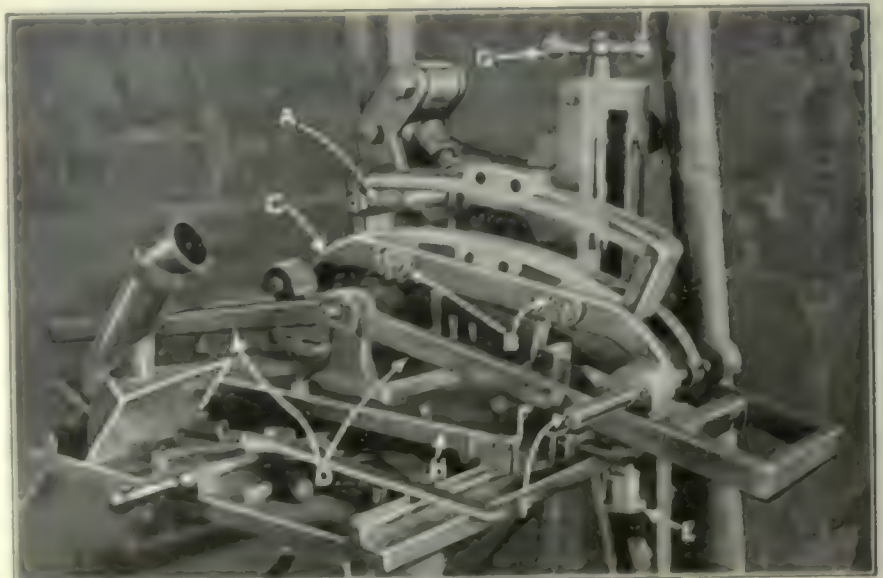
"HOME-MADE" LINK GRINDING MACHINE
